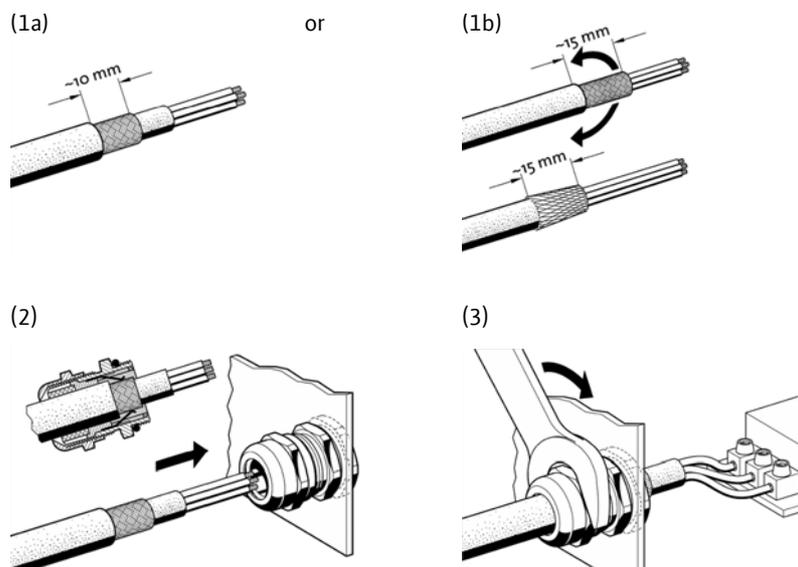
Connecting cable shields to the EMC threaded cable connections
